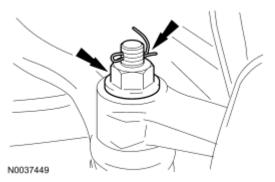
Locating Tie-Rod Ends Nuts And Cotter Pin Courtesy of FORD MOTOR CO.
